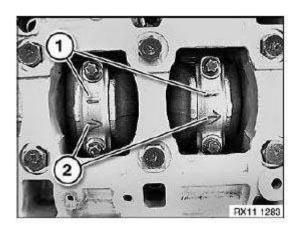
Identifying Camshaft Bearing Positions Courtesy of BMW OF NORTH AMERICA, INC.
